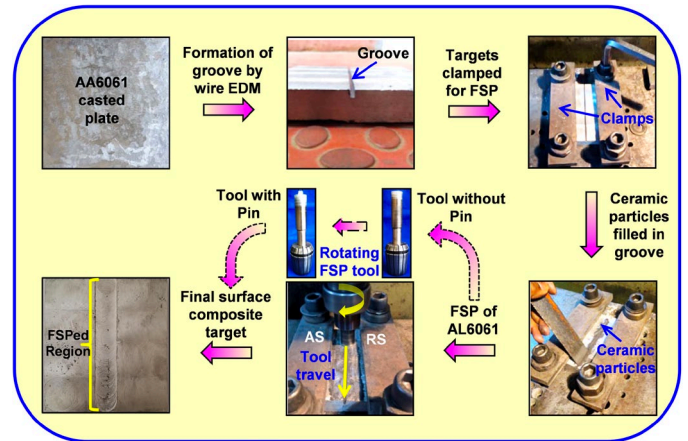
Details of the process involved in the fabrication of FSPed surface composite targets
